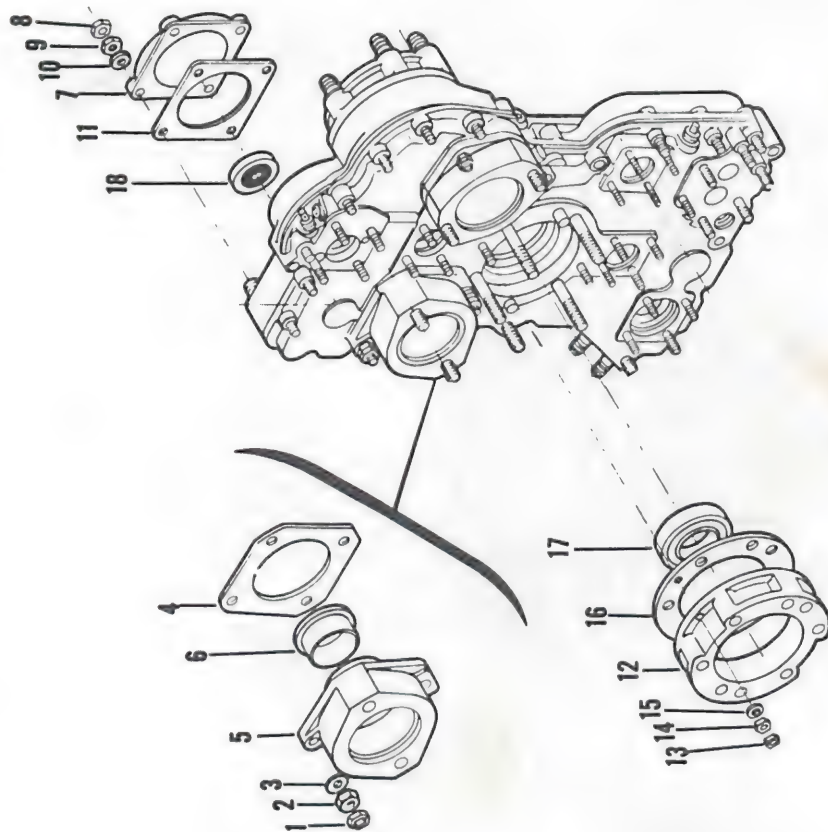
Starter Adapter and Hydraulic Pump Cover Installation - Accessory Case
